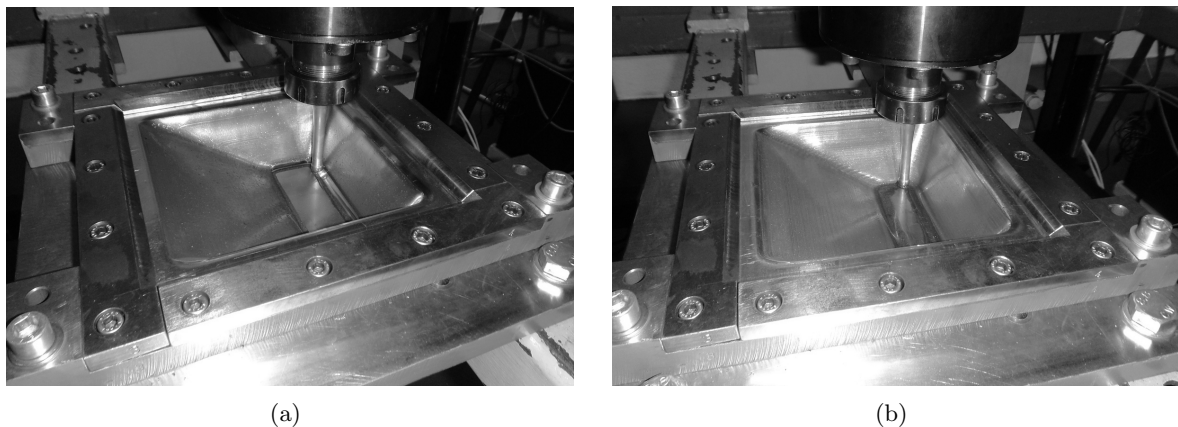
SPIF operation forming sheet metal thermoforming moulds: (a) positive (b) negative
